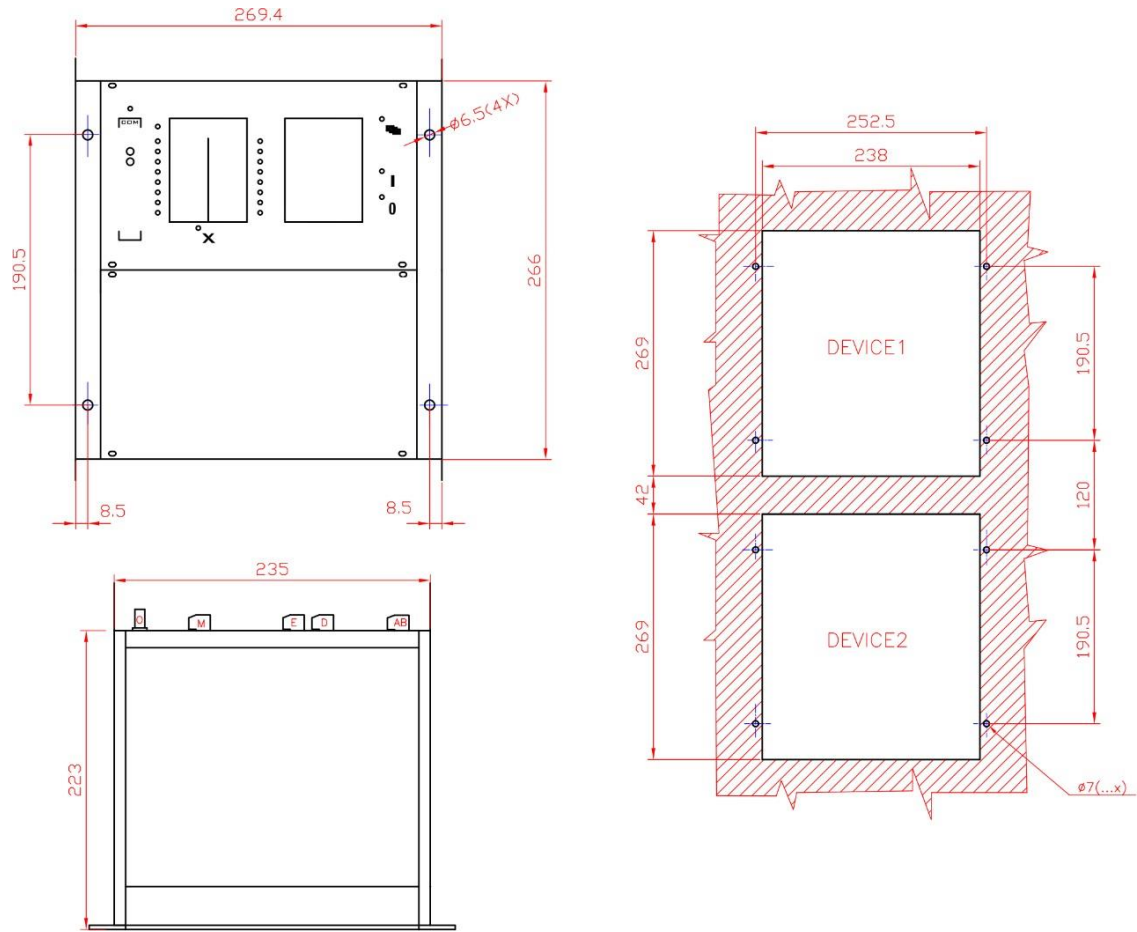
Dimensions for rack mounting of 42 HP double rack
